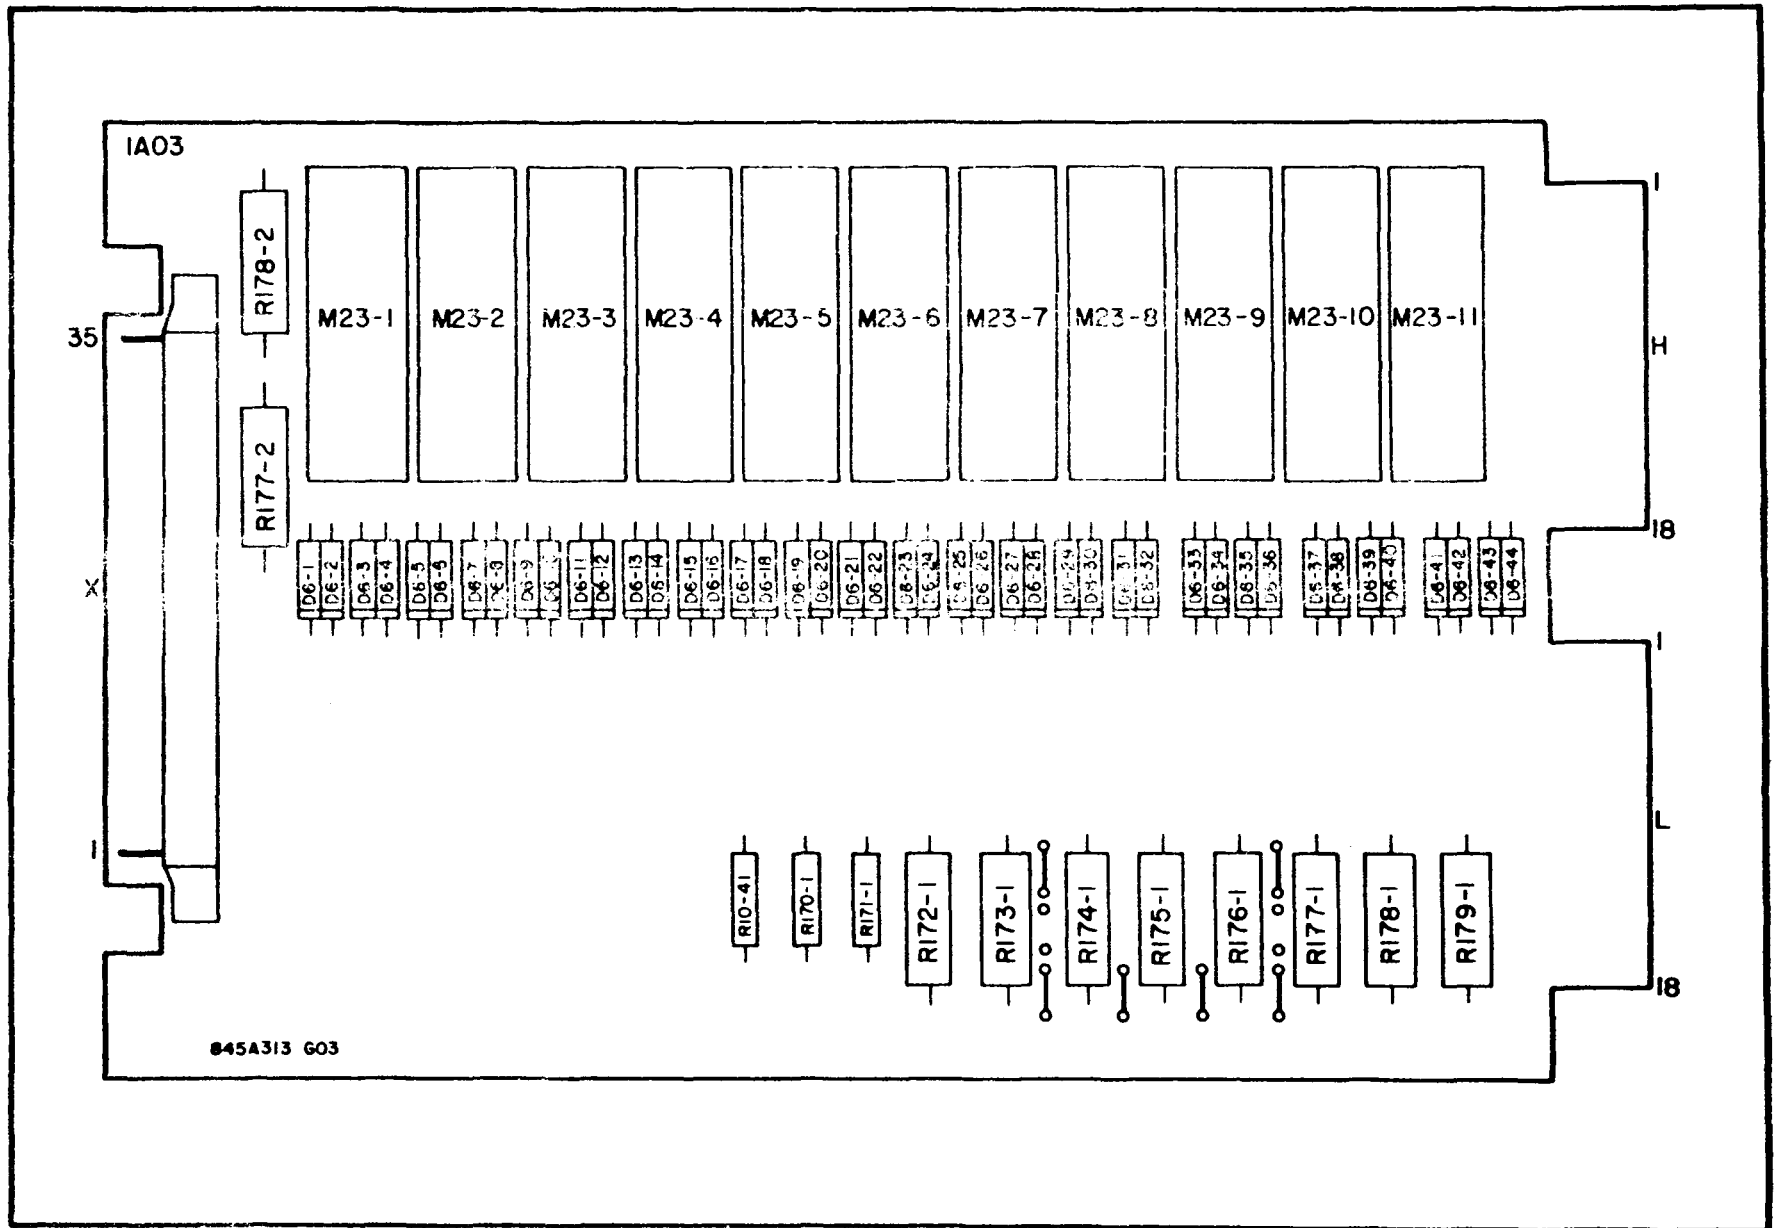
1A03 ASSEMBLY (REF. DWG. 845A313, SUB 3)
